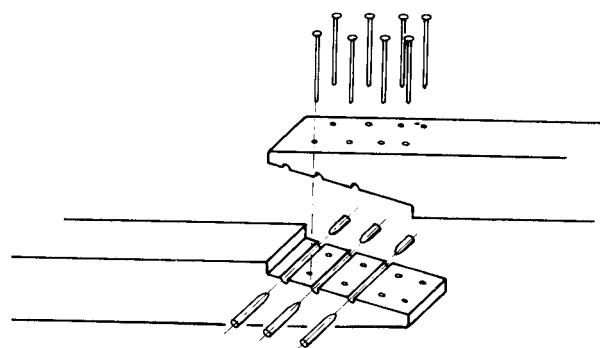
Joint in the keel. The joint was bolted through with eight bolts, and through its surface stopwaters were drilled; these were filled with moss and plugged with wooden dowels. (Drawing by A. J. Hoving)
